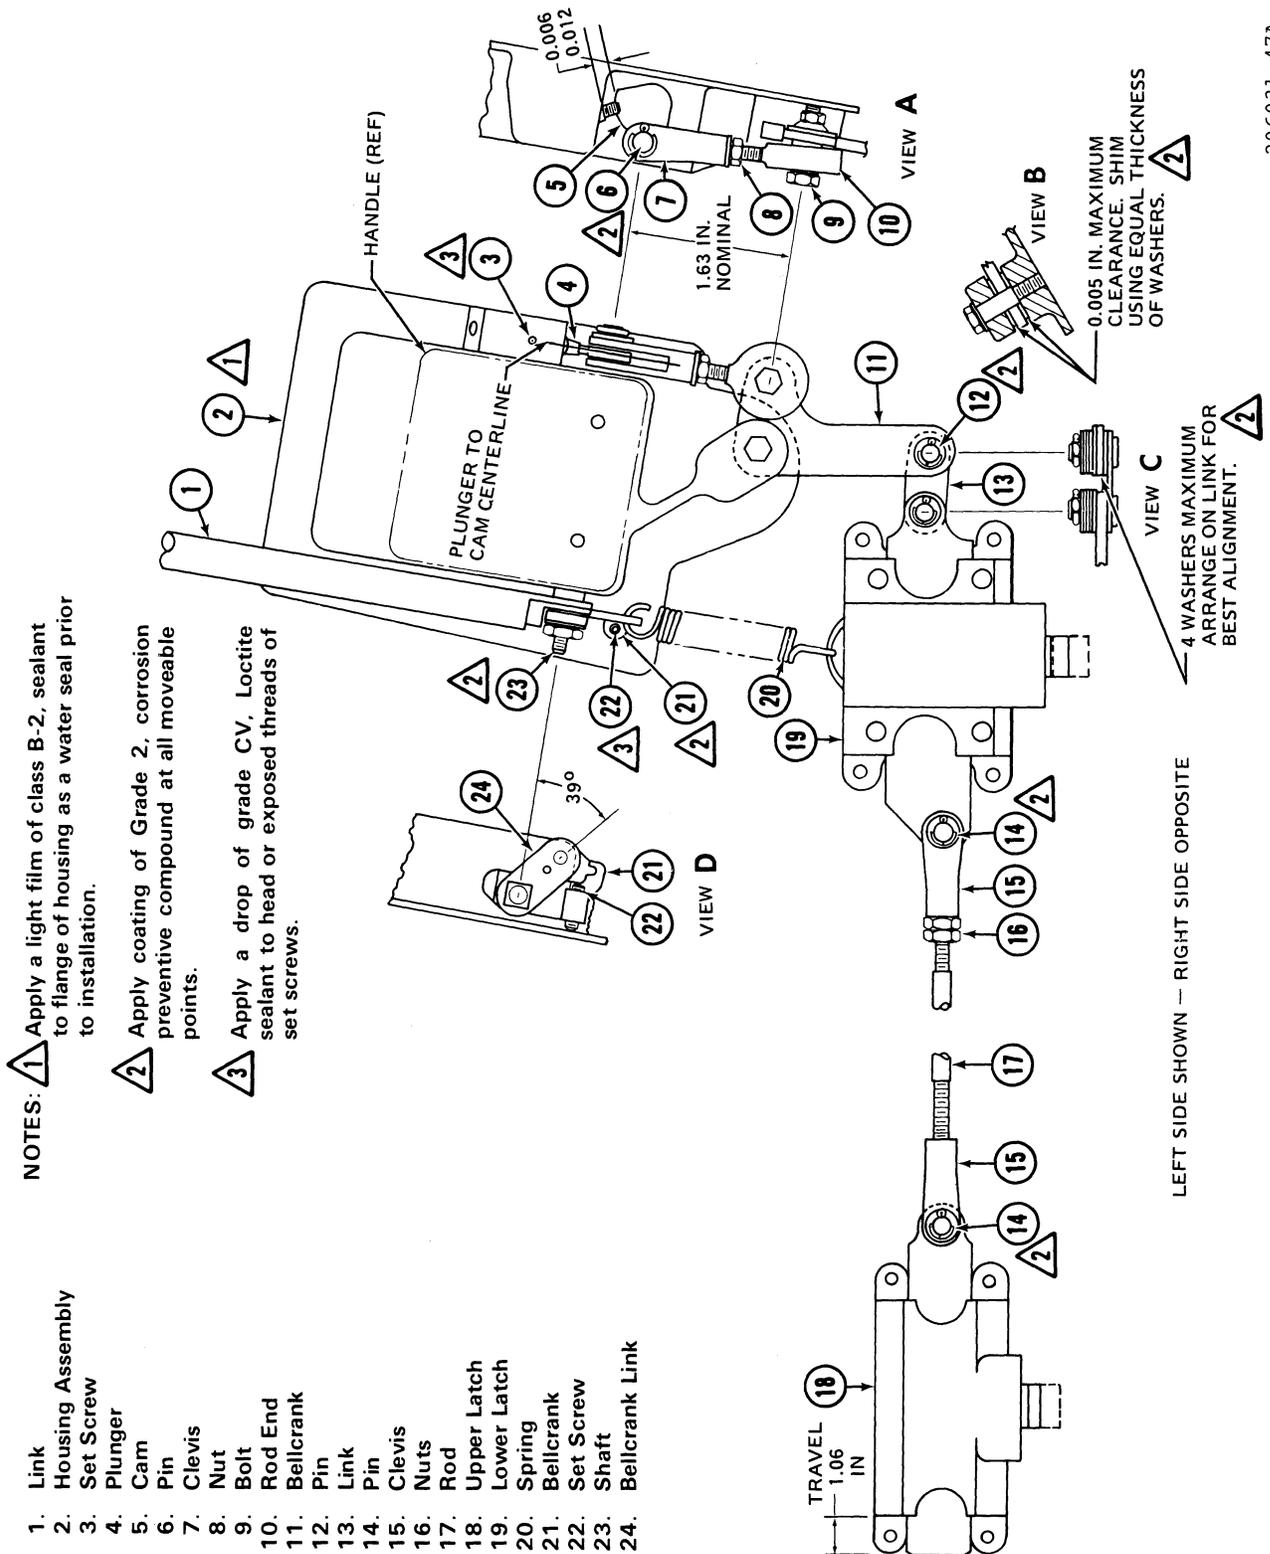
B. Cabin Doors — Dual Latch Assembly, Adjustment
